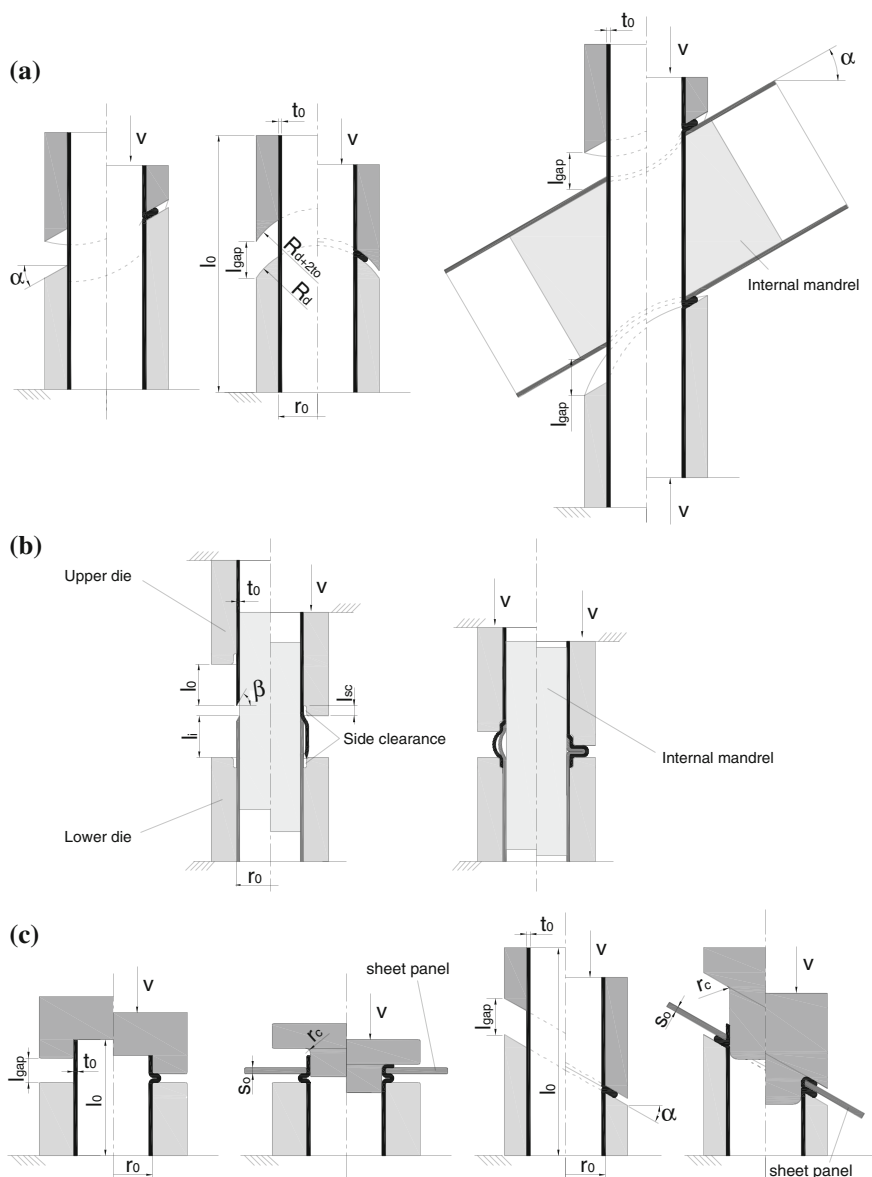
a Sectional schematic views of the tool setup to develop and propagate inclined, out-of-plane, instability waves in tubes and to produce inclined tube joints. b Sectional schematic views of the tool setup to develop and propagate simultaneous, in-plane, instability waves in tubes to produce end-to-end joints. c Sectional schematic views of the tool setup to develop and propagate inclined, in-plane, instability waves to fix tubes to sheets
